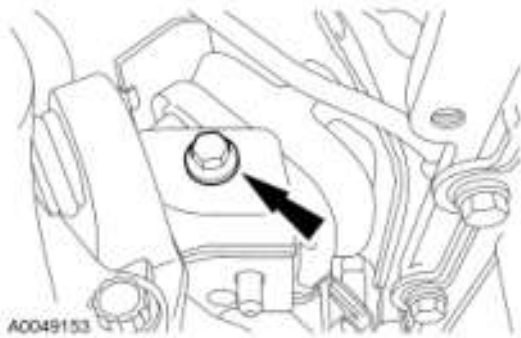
Locating Exhaust Manifold Flange Nuts
